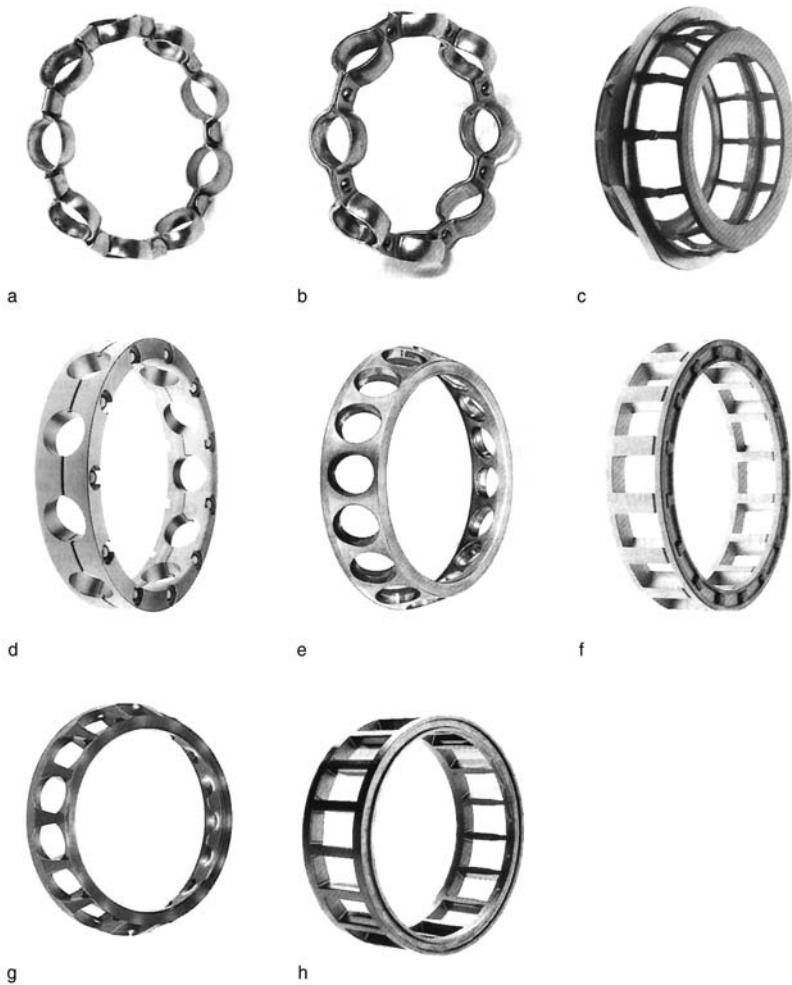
Examples of rolling bearing cages. *Pressed cages of steel*: Lug cage (a) and rivet cage (b) for deep-groove ball bearings, window-type cage (c) for spherical roller bearings. *Machined brass cages*: Riveted machined cage (d) for deep-groove ball bearings, brass window-type cage (e) for angular contact ball bearings and machined brass cage with integral crosspiece rivets (f) for cylindrical roller bearings. *Molded cages* made of glass-fibre reinforced polyamide: window-type cage (g) for single-row angular contact ball bearings and window-type cage (h) for cylindrical roller bearings. (From FAG, 1998, with permission.)
